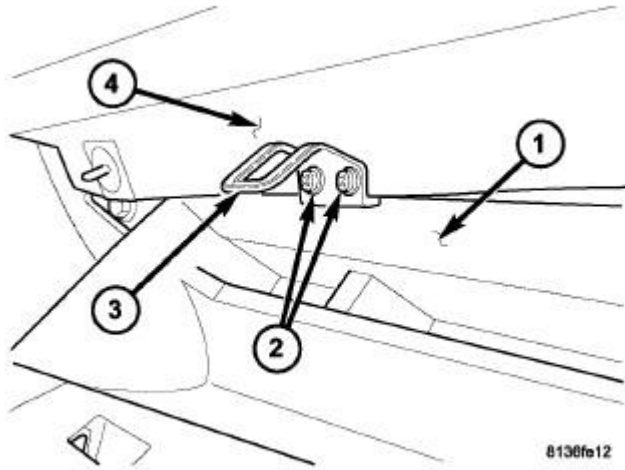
Removing/Installing Striker-Latch-Glove Box
